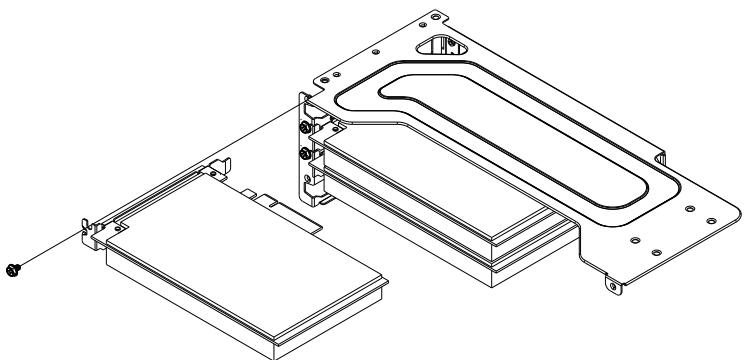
Installing Expansion Cards into the Expansion Card Bracket
